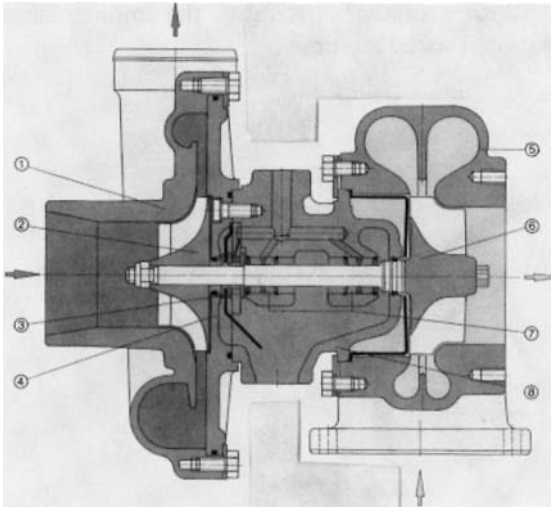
Components of the typical turbocharger: 1, compressor housing; 2, compressor wheel; 3, thrust bearing; 4, compressor backplate; 5, turbine housing; 6, turbine wheel; 7, bearings; 8, bearing housing. (Courtesy Kuhnle, Kopp & Kausch AG.)
